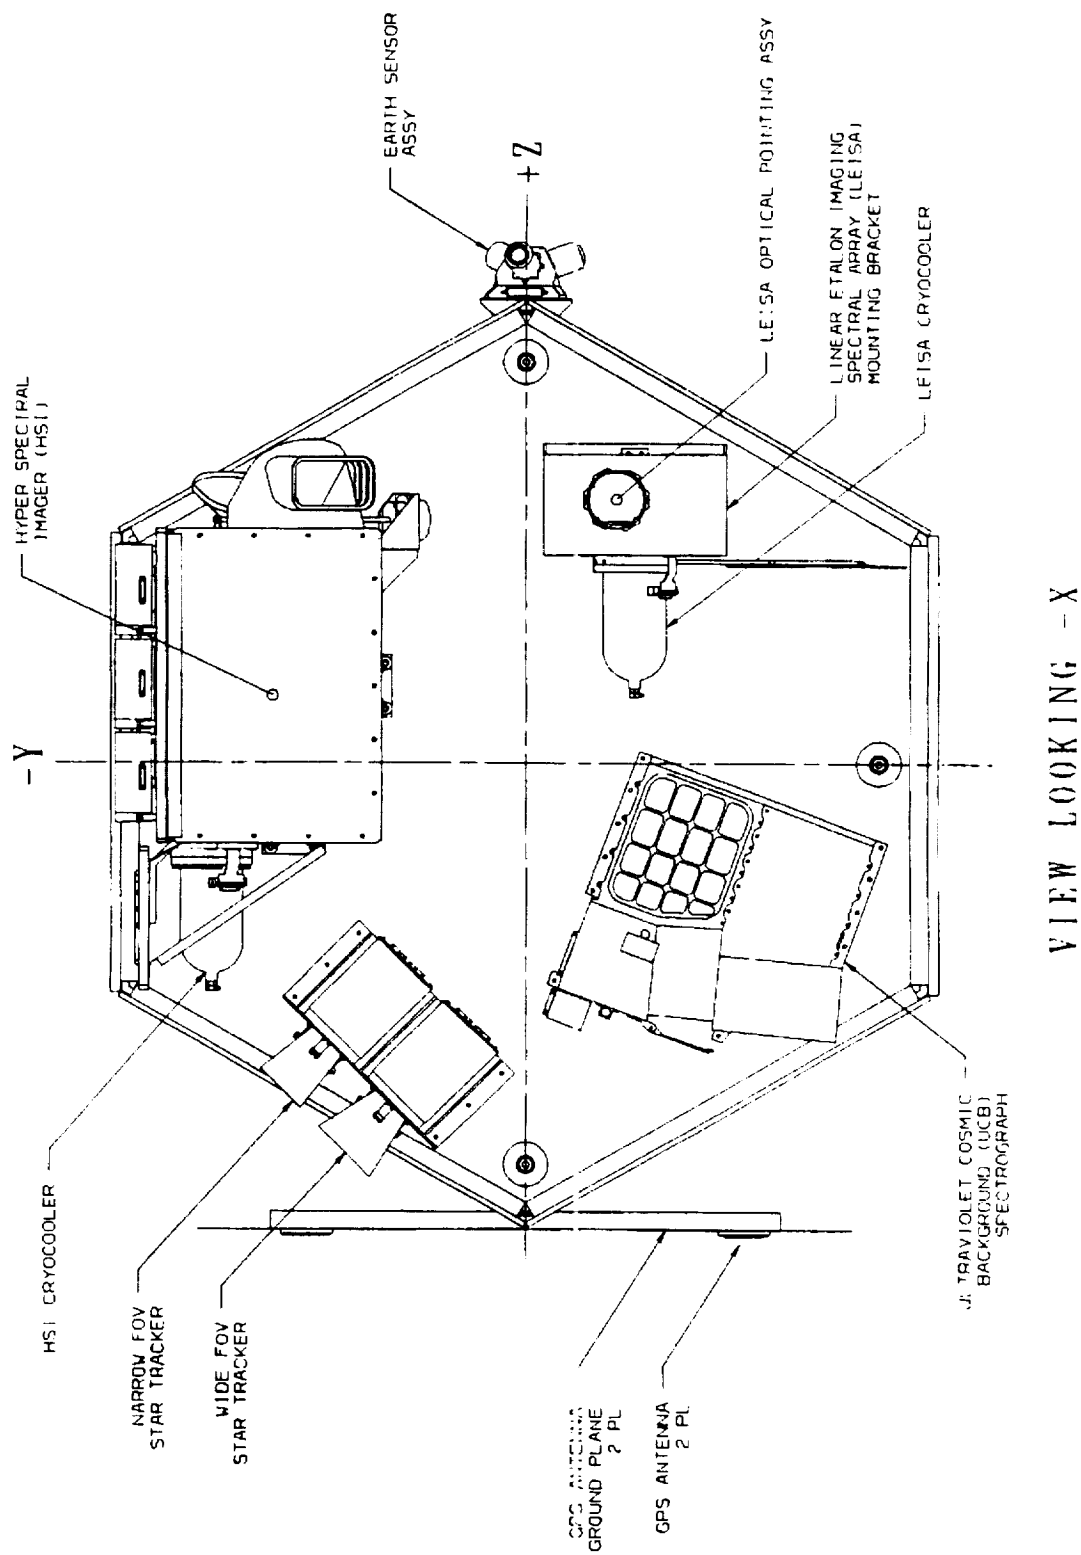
PAYLOAD INSTRUMENT MODULE PLAN VIEW
